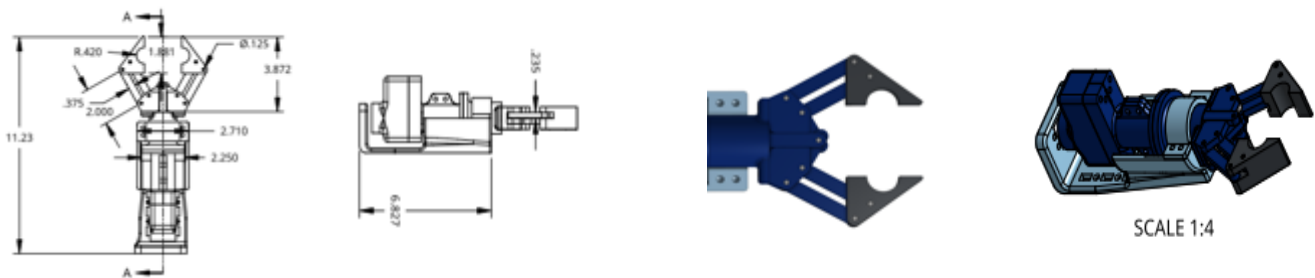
Pictures of the main manipulator with custom 3D printed parts.
